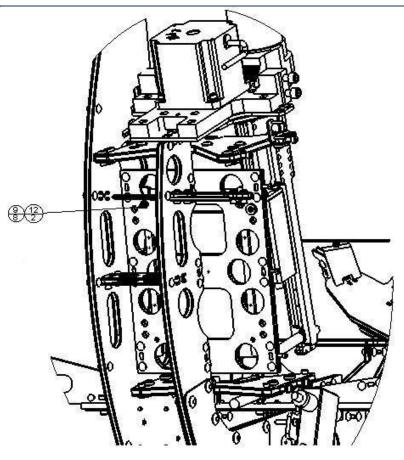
GILAT Ku-Band 4W ODU (BUC) Assembly - Detail N
